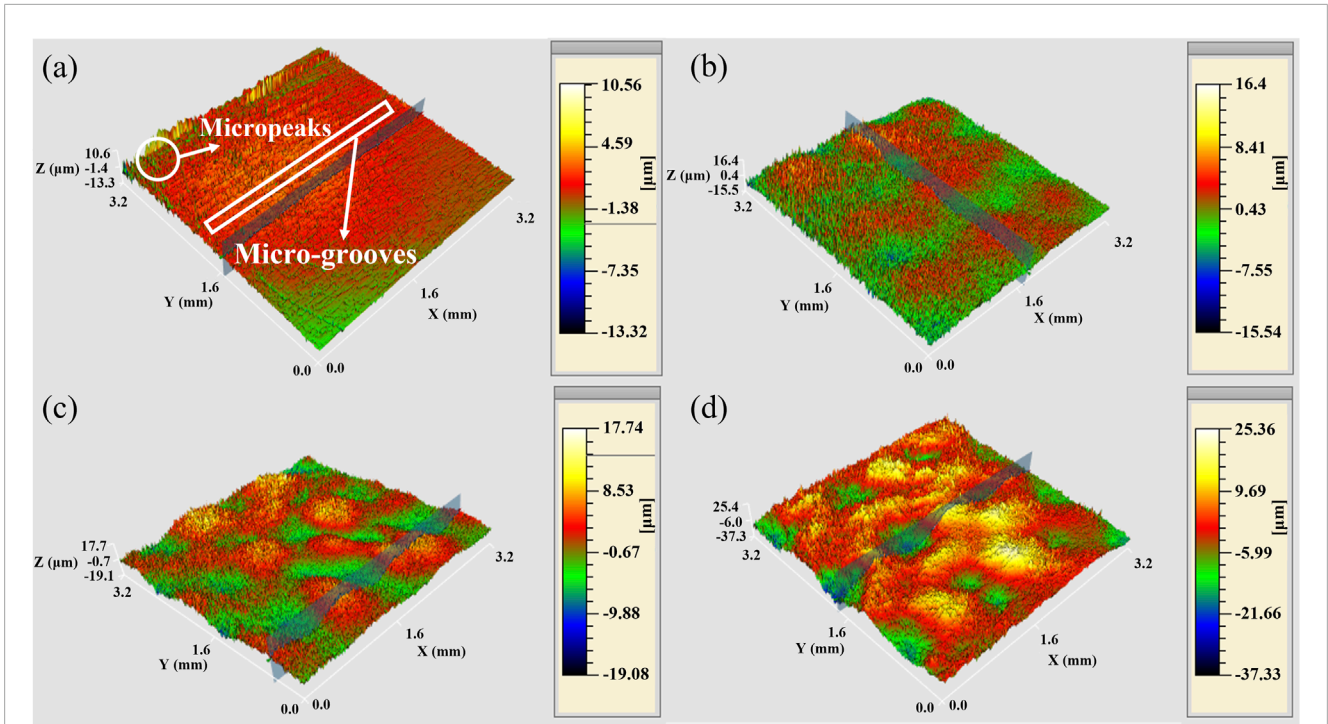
Surface 3D topography of welded joints before and after LSP (A) No LSP; (B) 2.79 GW/cm²; (C) 3.98 GW/cm²; (D) 5.17 GW/cm².
